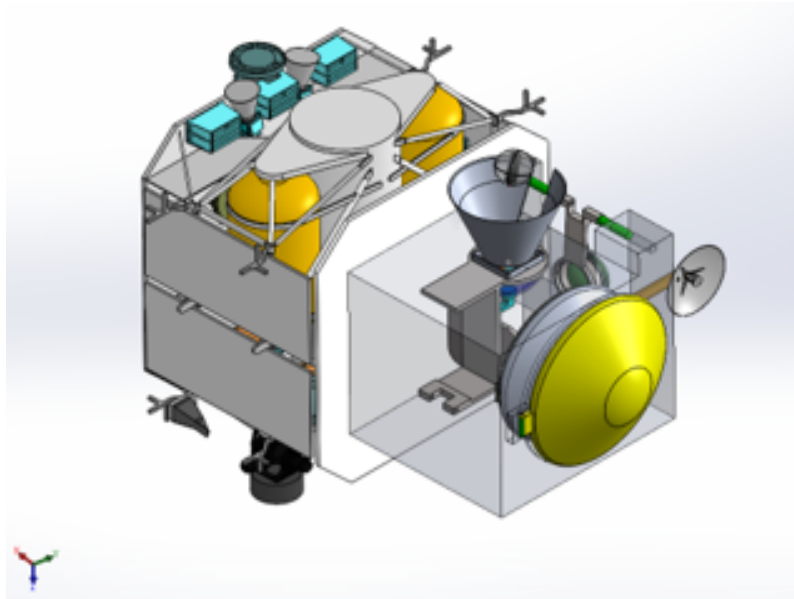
Preliminary Wiper system assembly attached to a concept of the SRO spacecraft (zoom-in).
